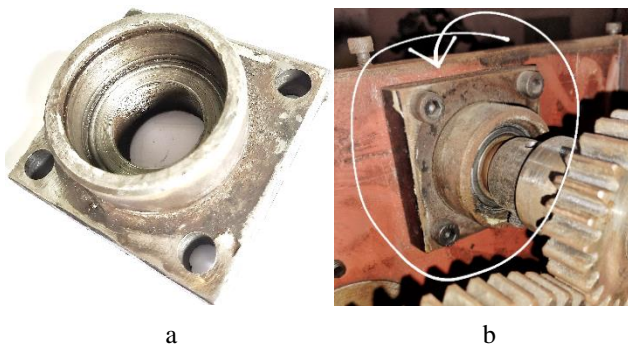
a) General view of the fabricated welded flange; b) welded flange of plate thickness 20 mm assembled onto an industrial core cutting machine in the workshop
